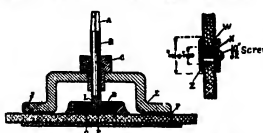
APPARATUS FOR BORING LARGE HOLES IN GLASS. FIG. 2—METHOD OF REPAIRING CRACKED PLATE GLASS.
